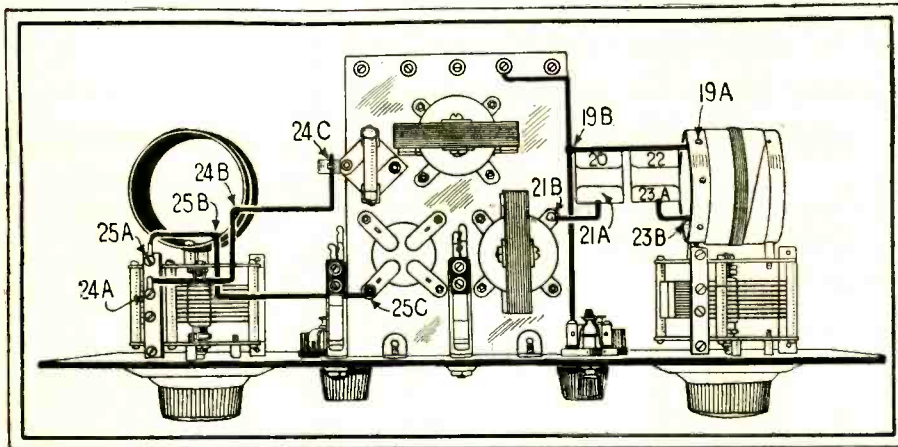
Sixth step is to mount the two Counterformers T1 and T2.
